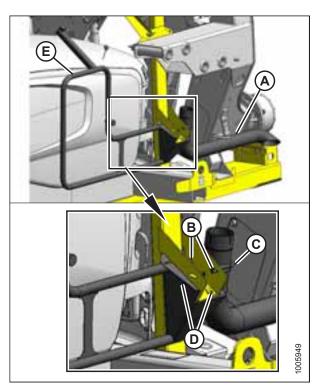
Hand Rails and Exhaust Stack Shipping Position
